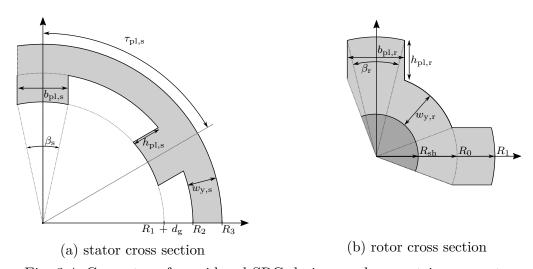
Geometry of considered SRG designs and geometric parameters.
